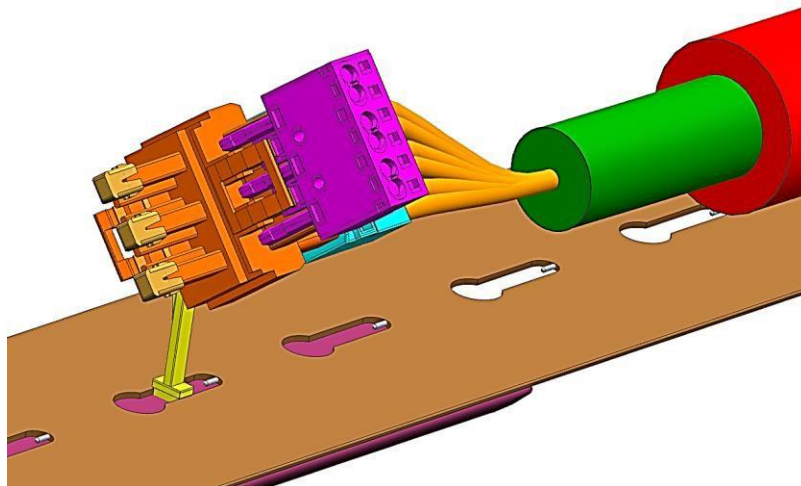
First Wago-mini carrier assembly with locking cap detailed view
